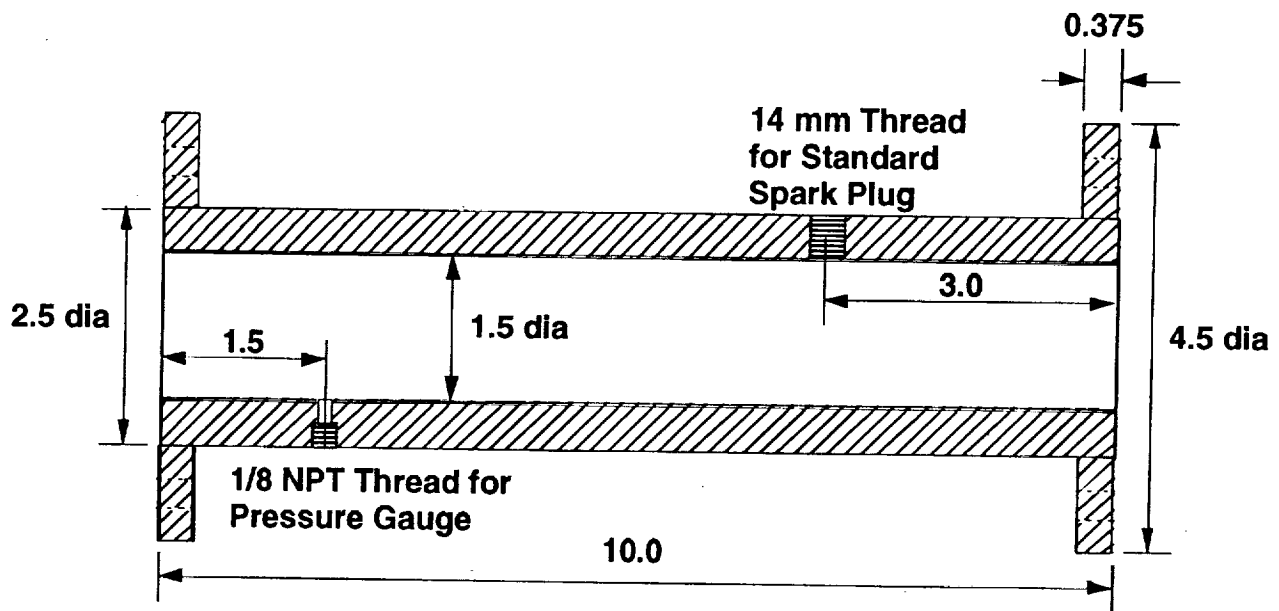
Combustion chamber configuration. (All dimensions in inches).
